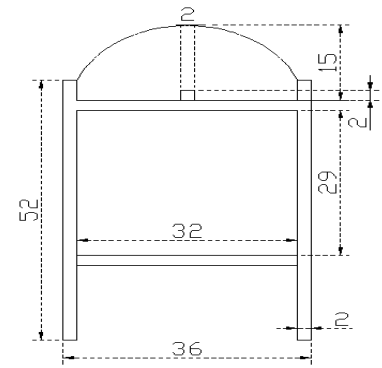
2 View drawing of Test stand (Dimensions in Inches)
